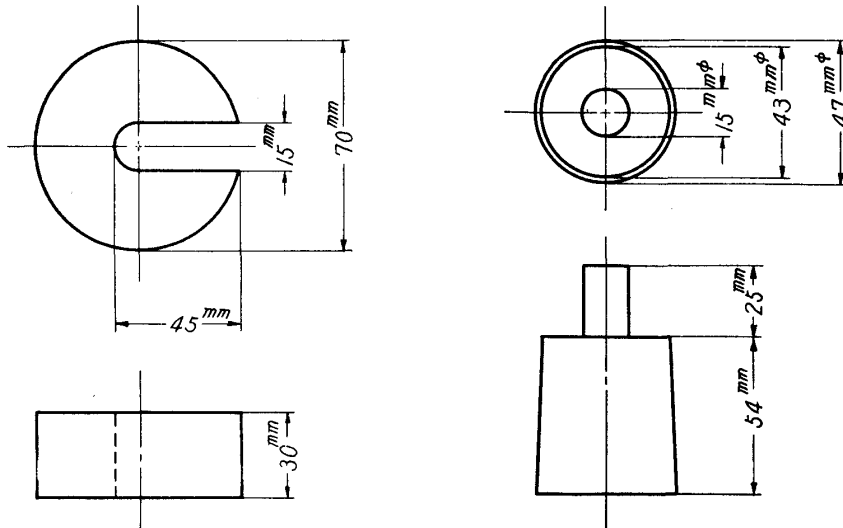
Size of shrinkage cavity test specimens. (Green sand mold)
